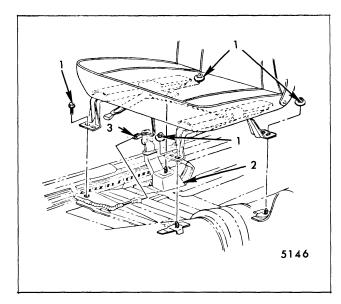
"A" Body Manually Operated Bucket Seats, Except Swivel Buckets (Passenger Side Shown - Drivers Side Typical)
